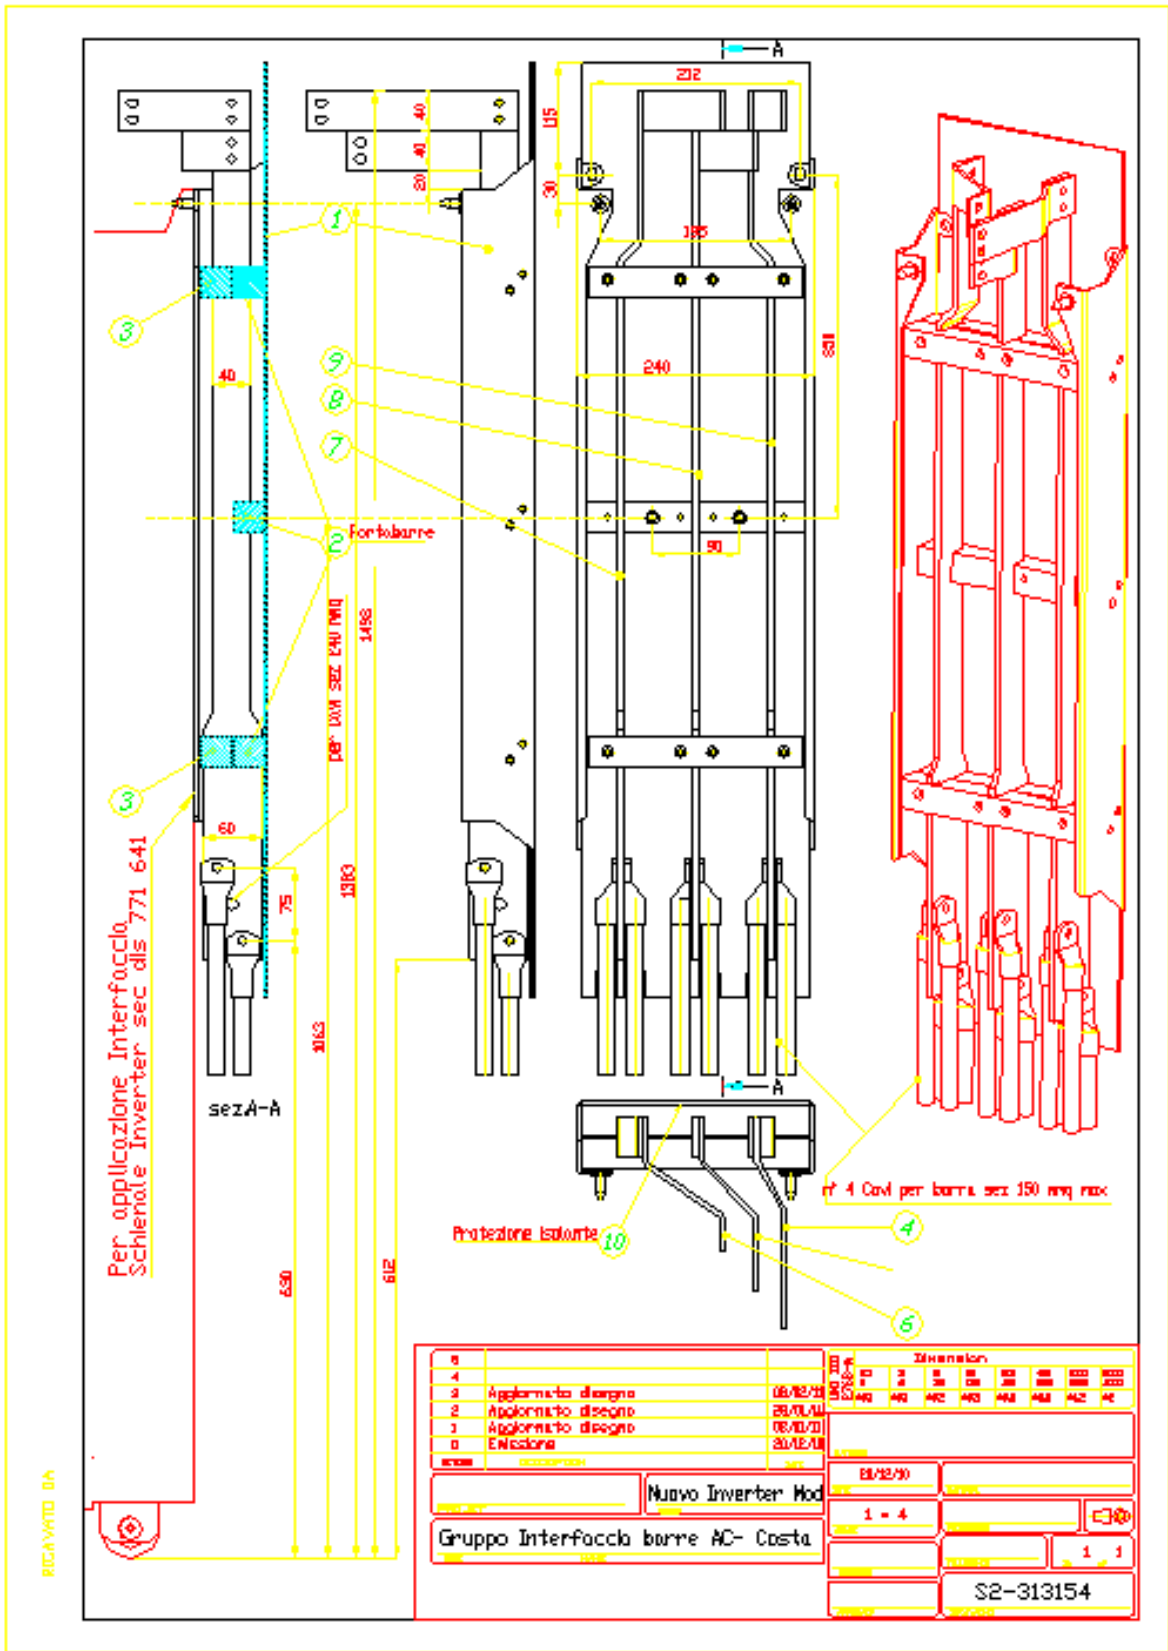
Inverter 3D drawings - Rear kit bar AC OUTPUT
